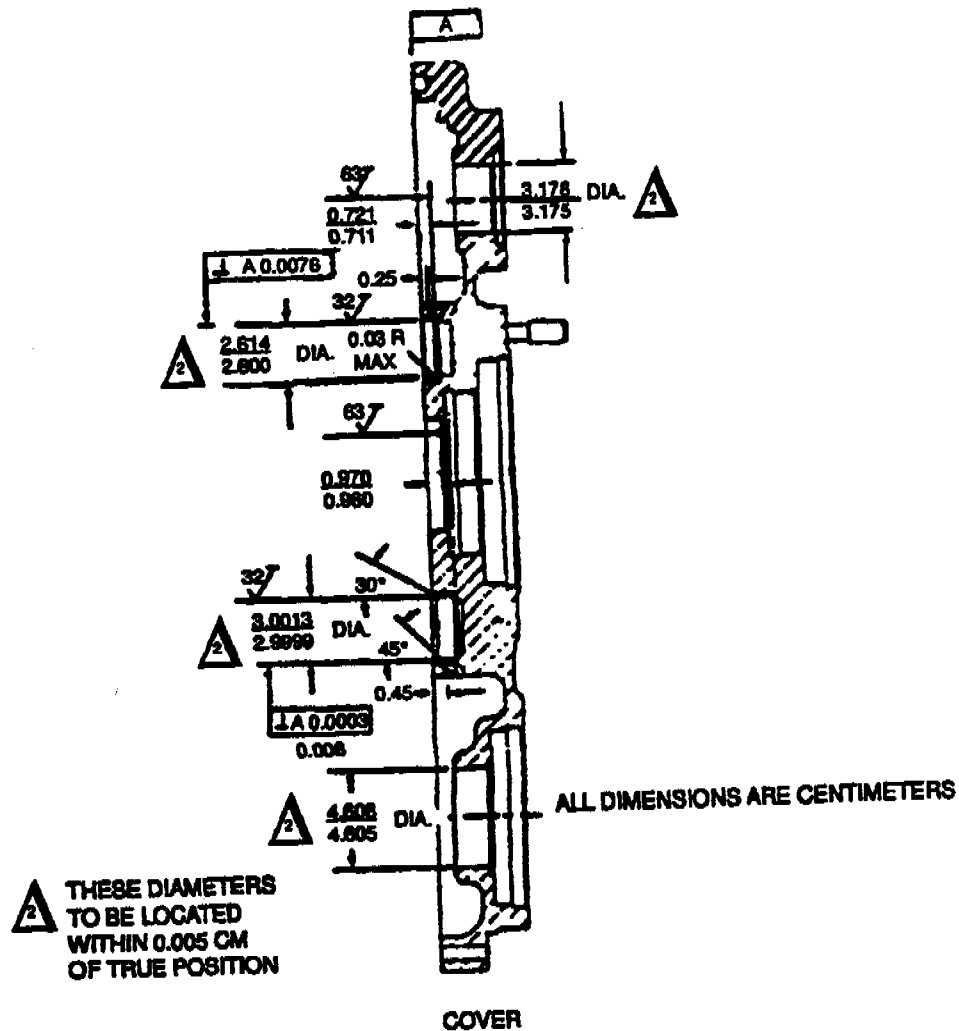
Accessory Drive Gearbox Bearing Liner Repair (Metric) (Sheet 1 of 2).
